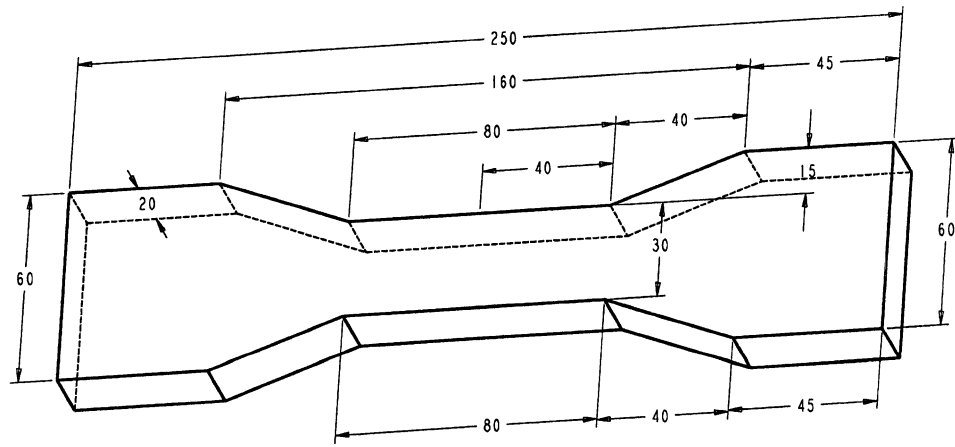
Specimen configuration. Dimensions are in millimeters.
